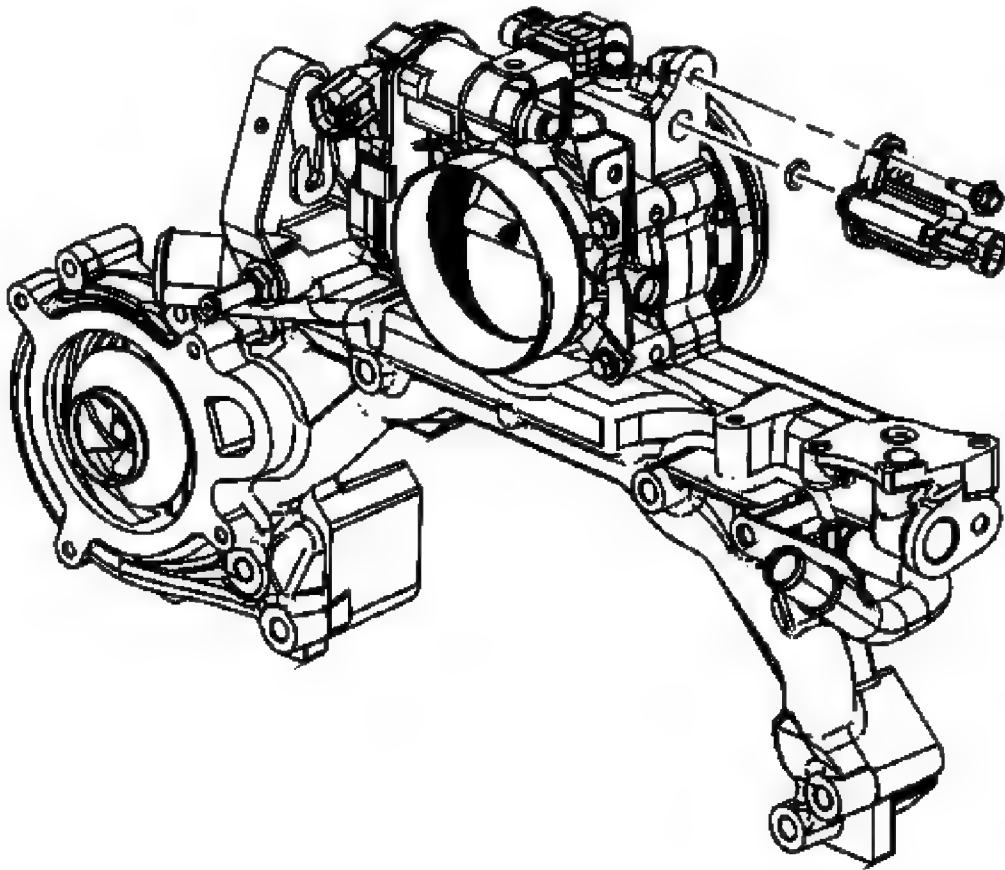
View Of EVAP Canister Purge Solenoid Valve & Bolt
